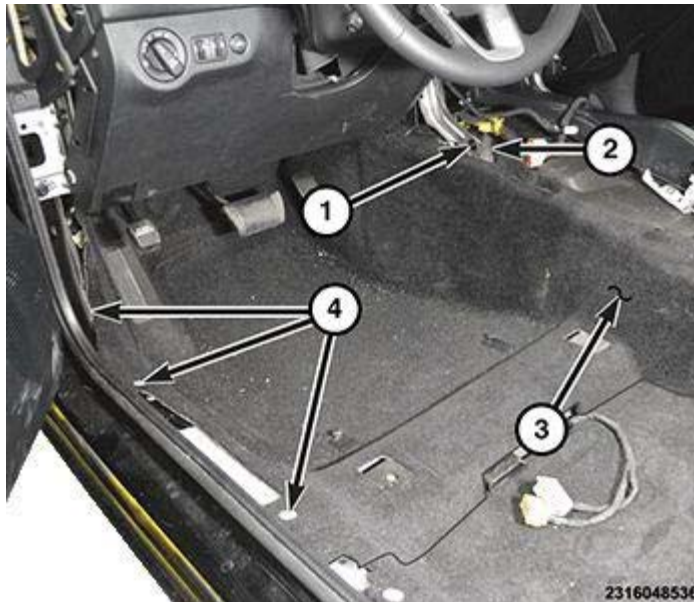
Instrument Panel Bracket, Bolt, Front Floor Carpet & Push Fasteners
